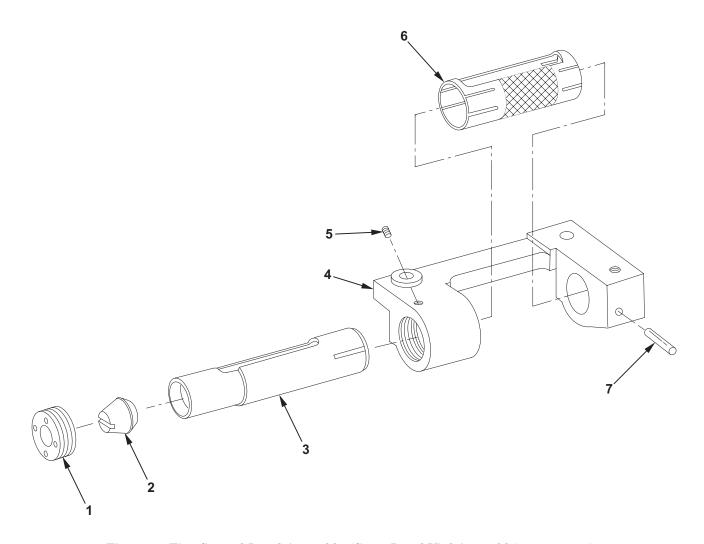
Fire Control Level Assembly (Cross Level Vial Assembly), 11729551/13005081.
